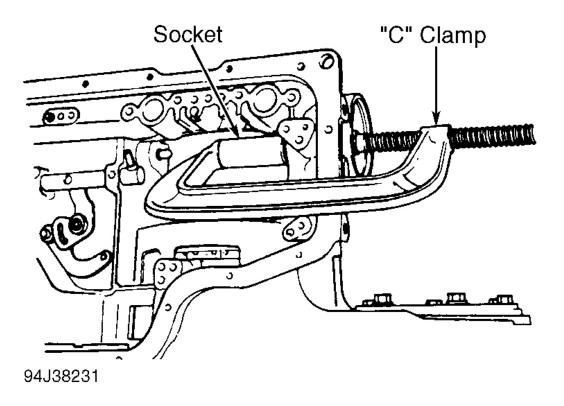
Compressing Band Apply Servo Courtesy of FORD MOTOR CO.
